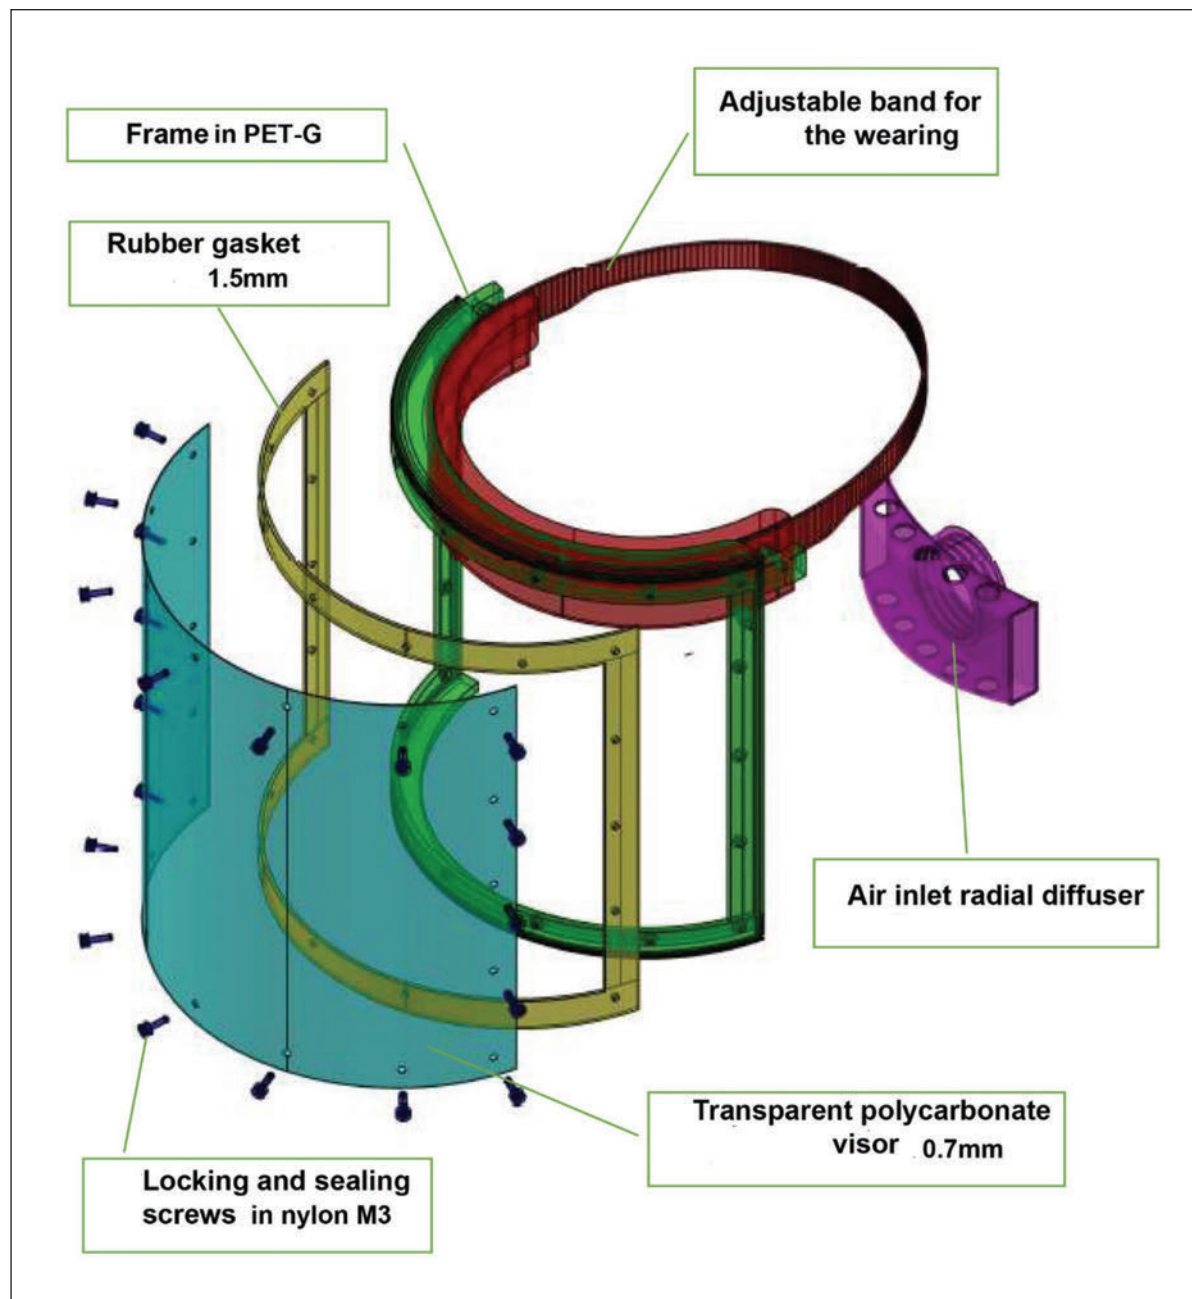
Exploded view of the construction details relating to the modification (excluding the band for the wearing that comes reused)
